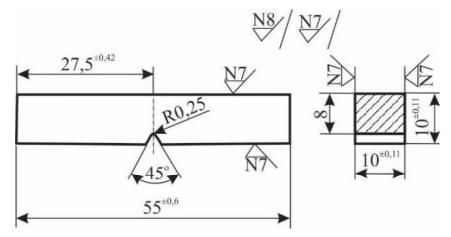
Drawing of a sample for impact testing of the weld face's characteristic zones
